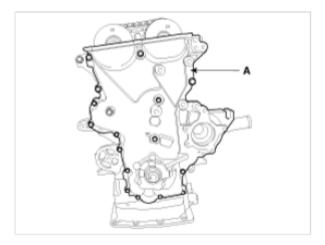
Identifying Timing Chain Cover Courtesy of HYUNDAI MOTOR AMERICA
